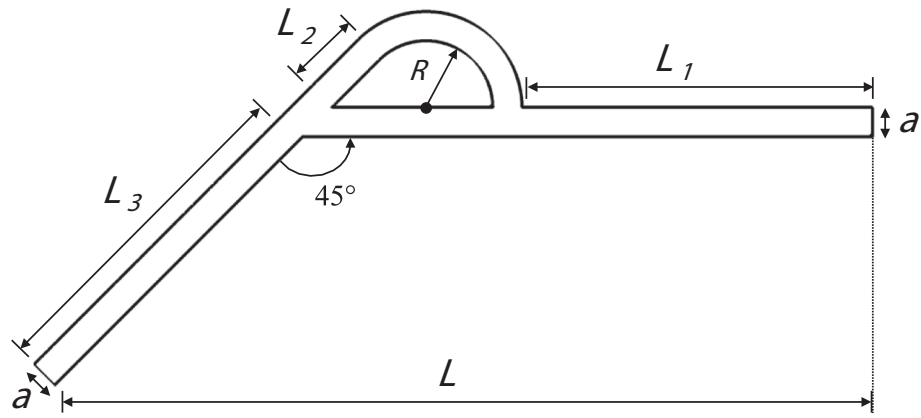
Presentation of the T45-R Tesla valve geometry.
